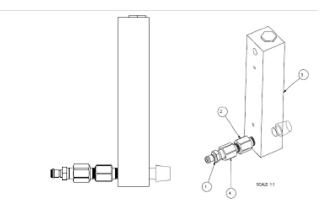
TEST FLOWMETER ASSEMBLY
